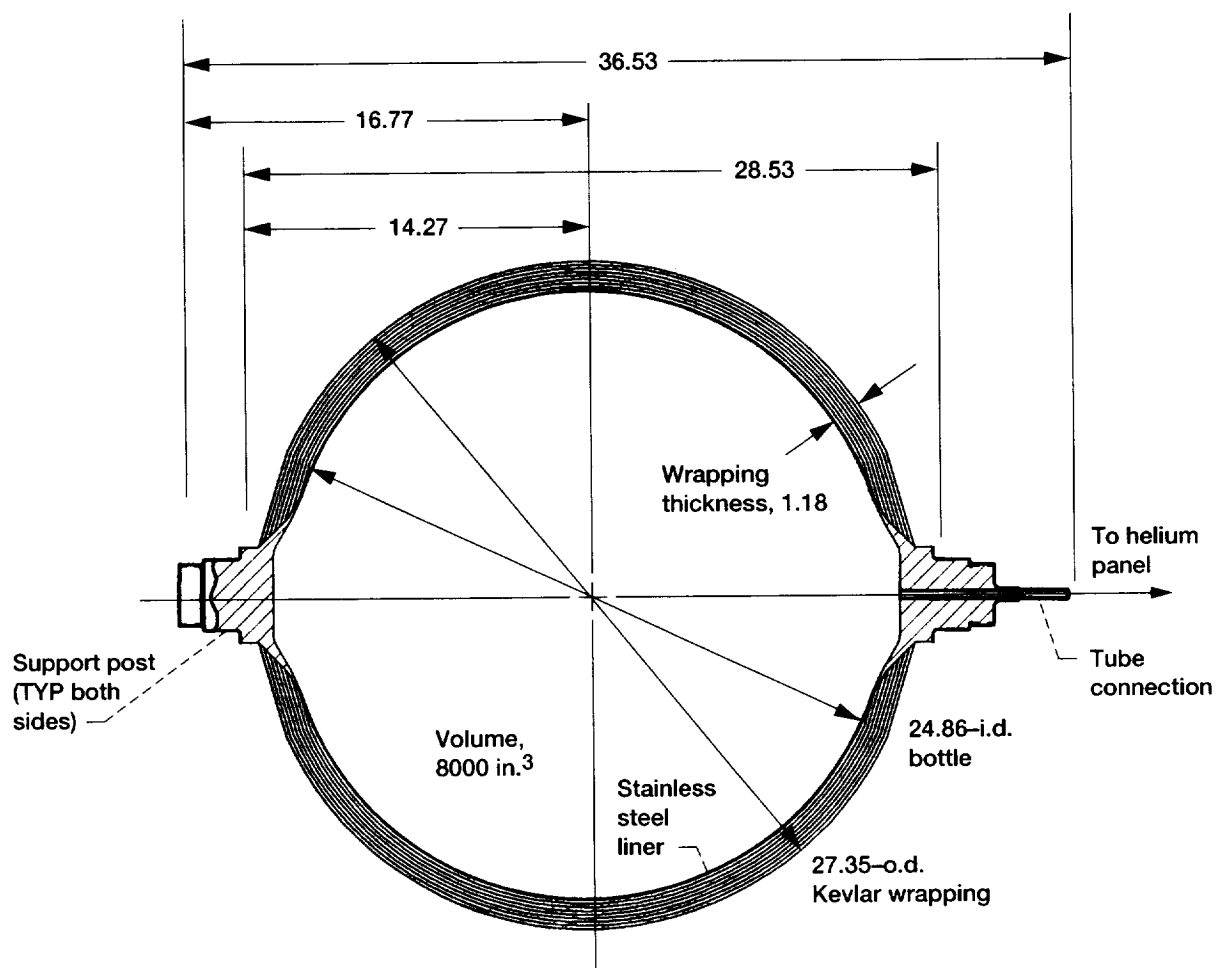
Helium bottle cross section. Dimensions are in inches.
